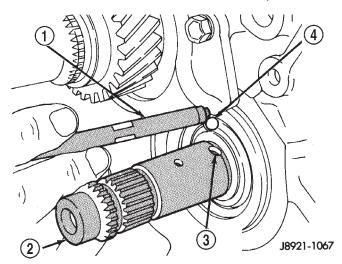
Remove Fifth Gear Thrust Ring Lock Ball
